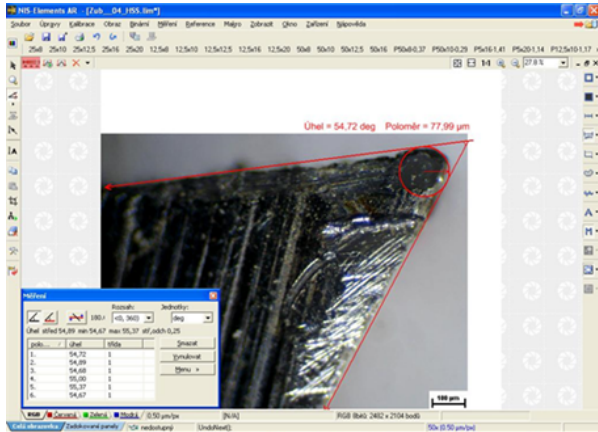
Wear of a cutting wedge - the alteration of the angle β - saw blade without sintered carbide plates
